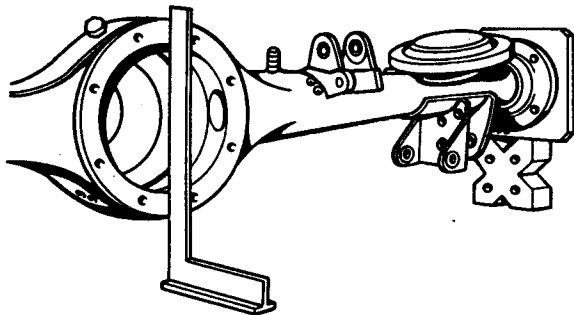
Checking Final Drive Mounting Surface for Perpendicularity
